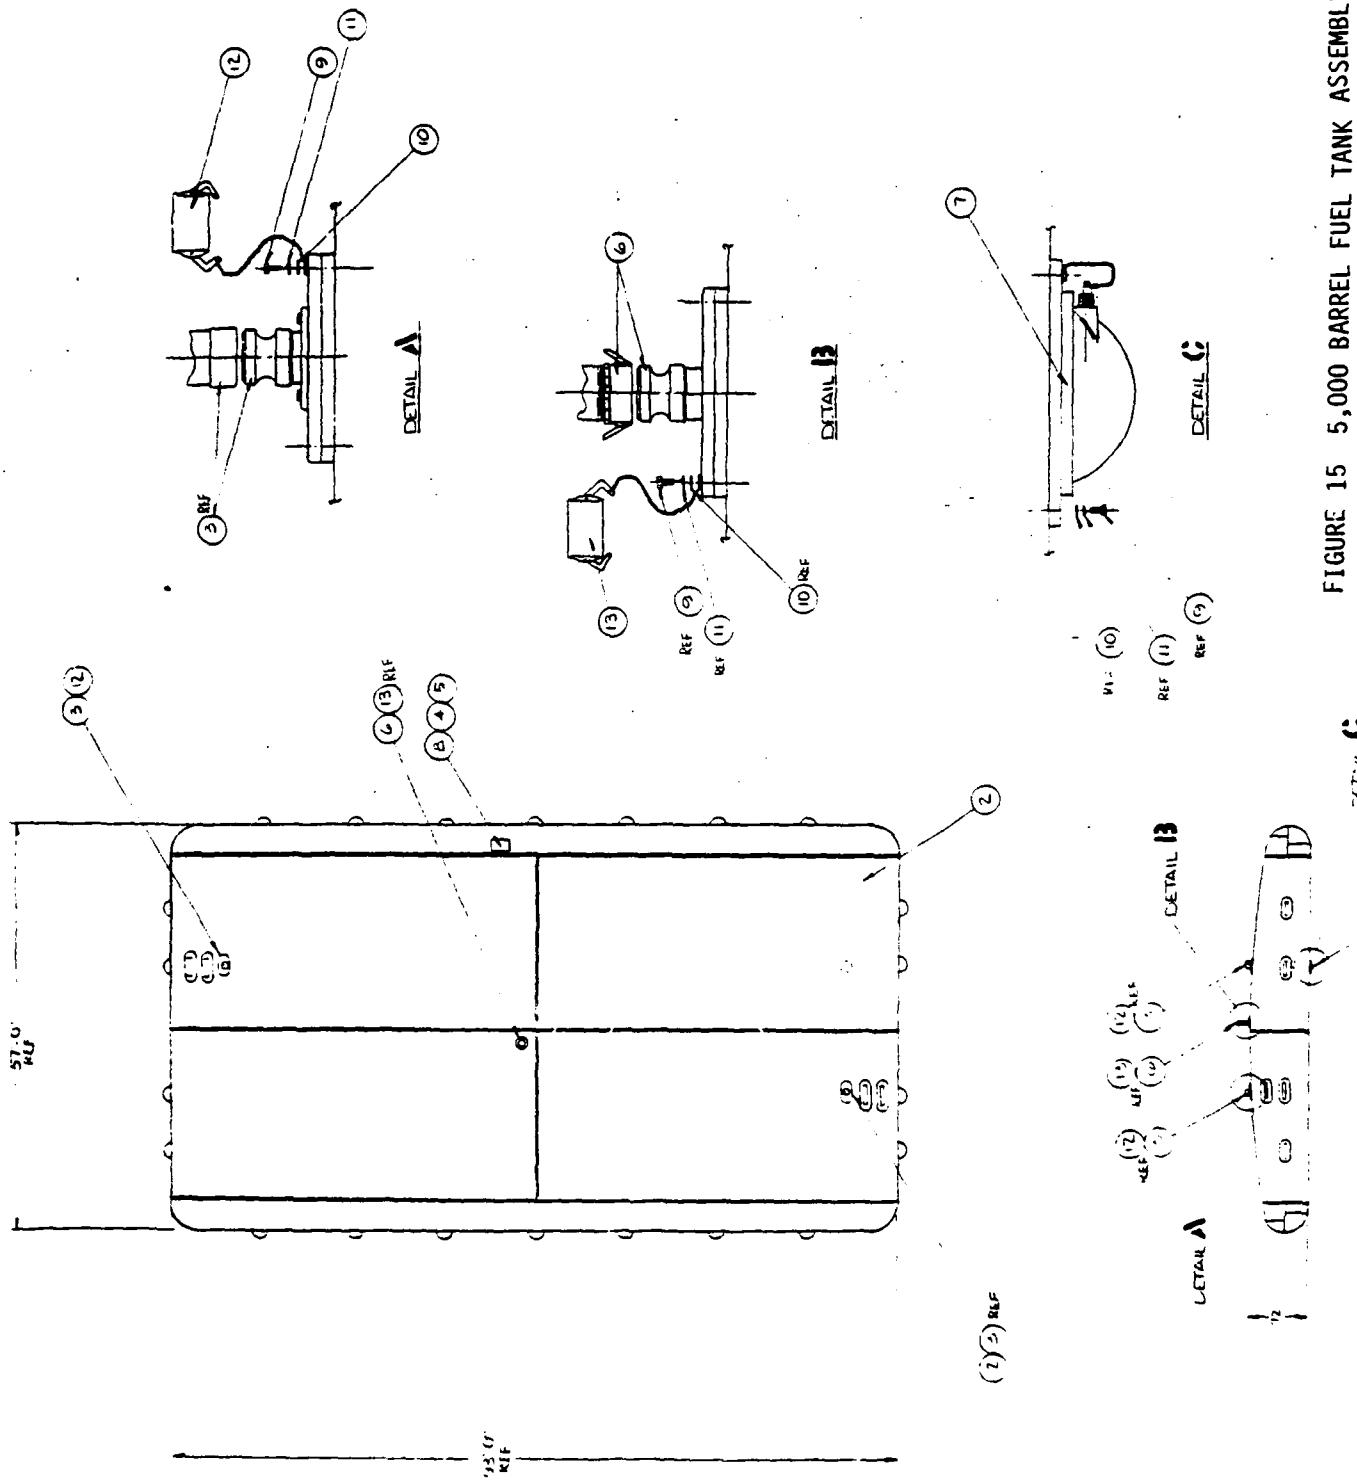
5,000 BARREL FUEL TANK ASSEMBLY
